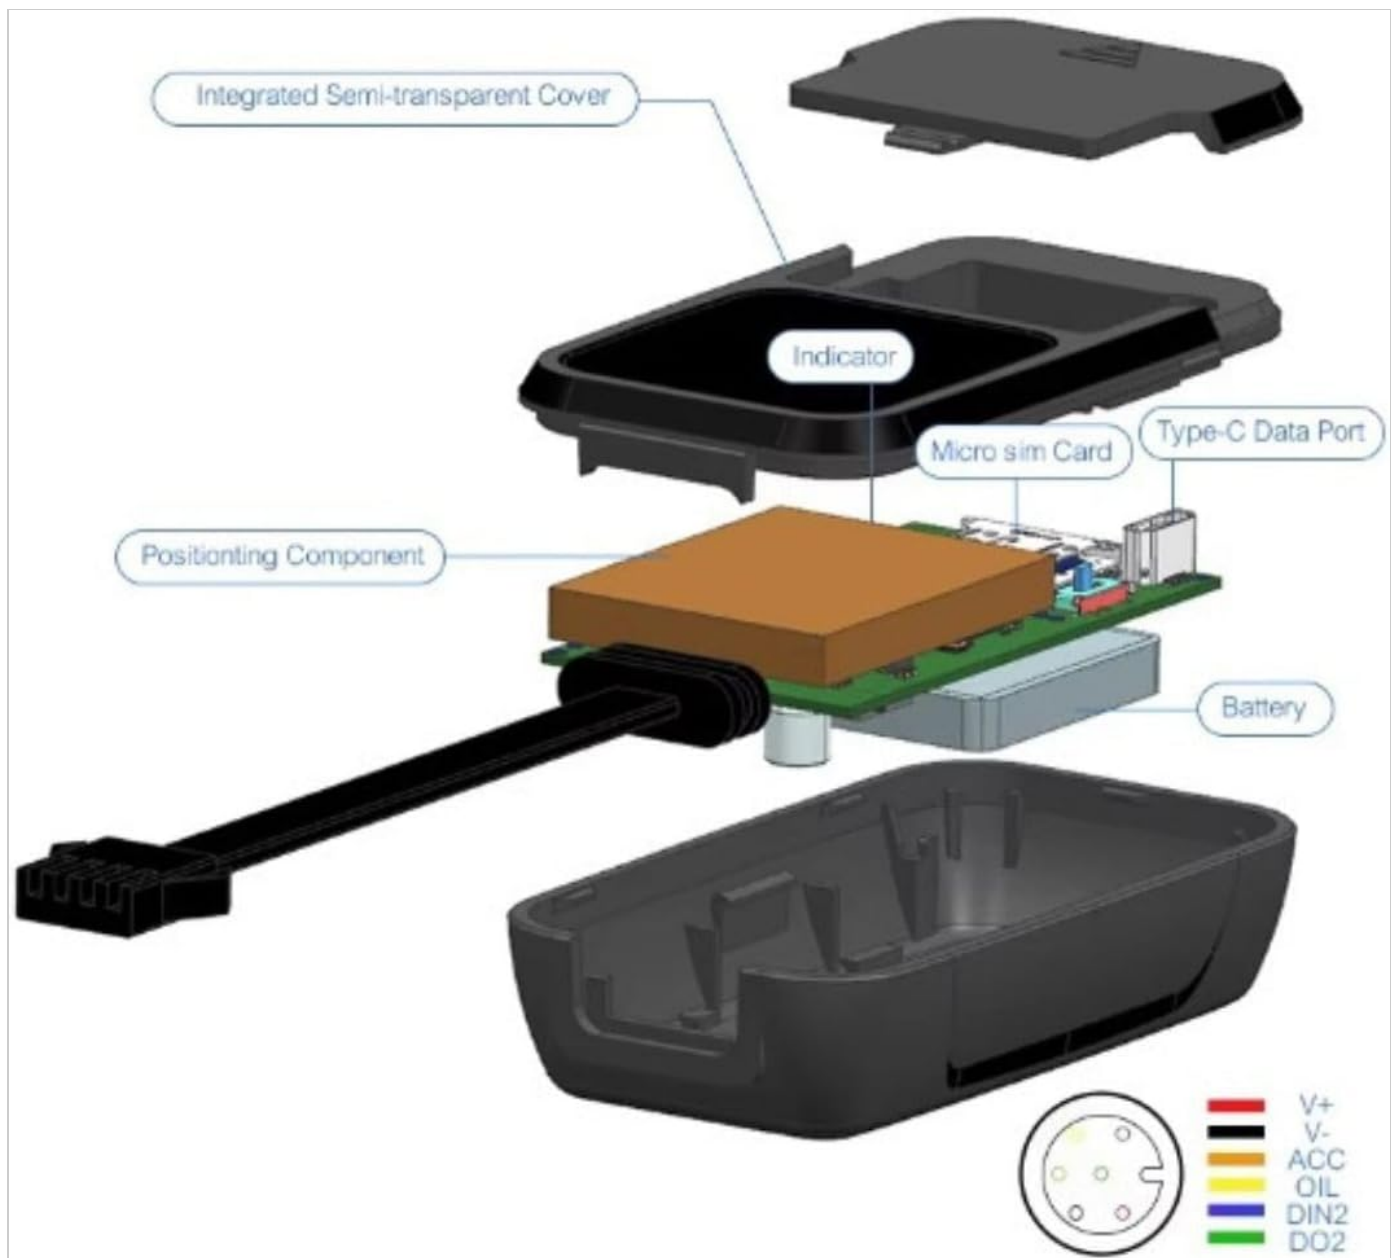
Exploded view of the EC33 tracker, illustrating its internal components: integrated semi-transparent cover, indicator light, micro SIM card slot, Type-C data port, positioning component, battery, and the main casing. A detailed wiring diagram for the harness is also shown, indicating connections for V+ (red), V- (black), ACC (yellow), OIL (green), DIN2 (blue), and DO2 (white).
